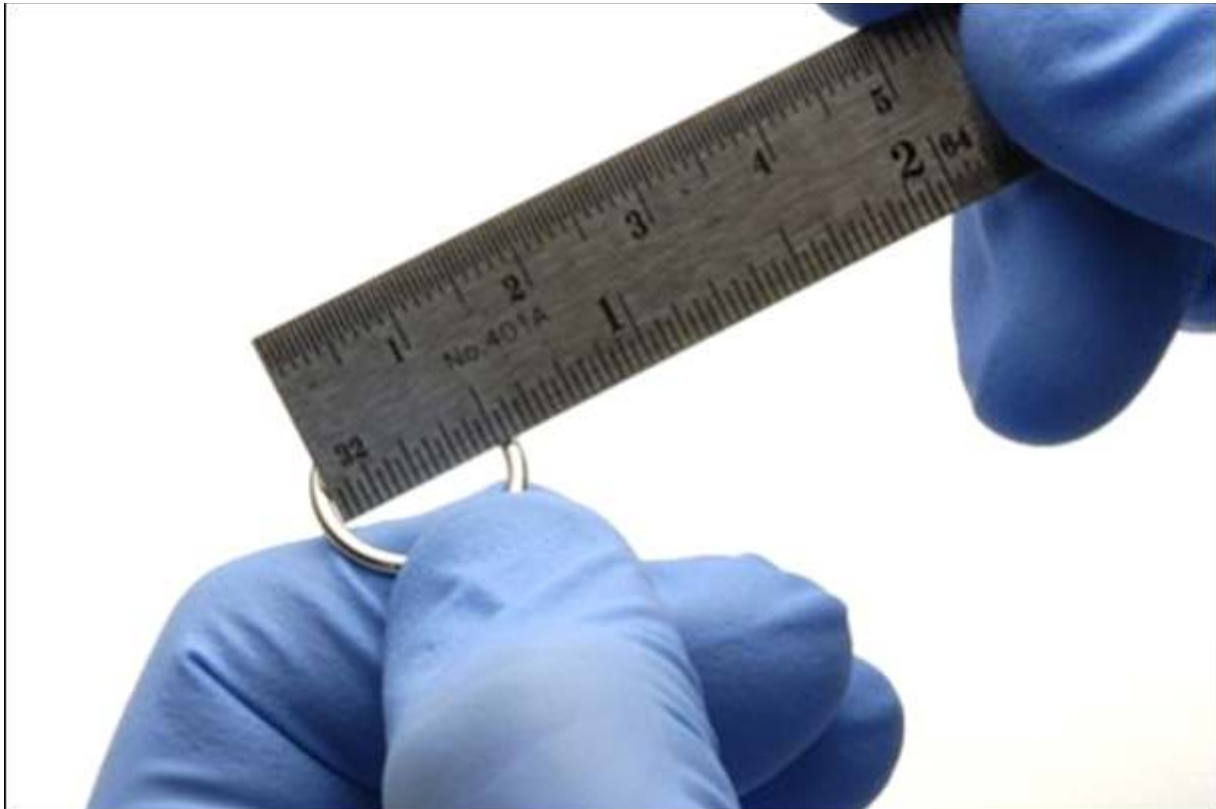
Tools for Layout of Design – Metal Ruler
